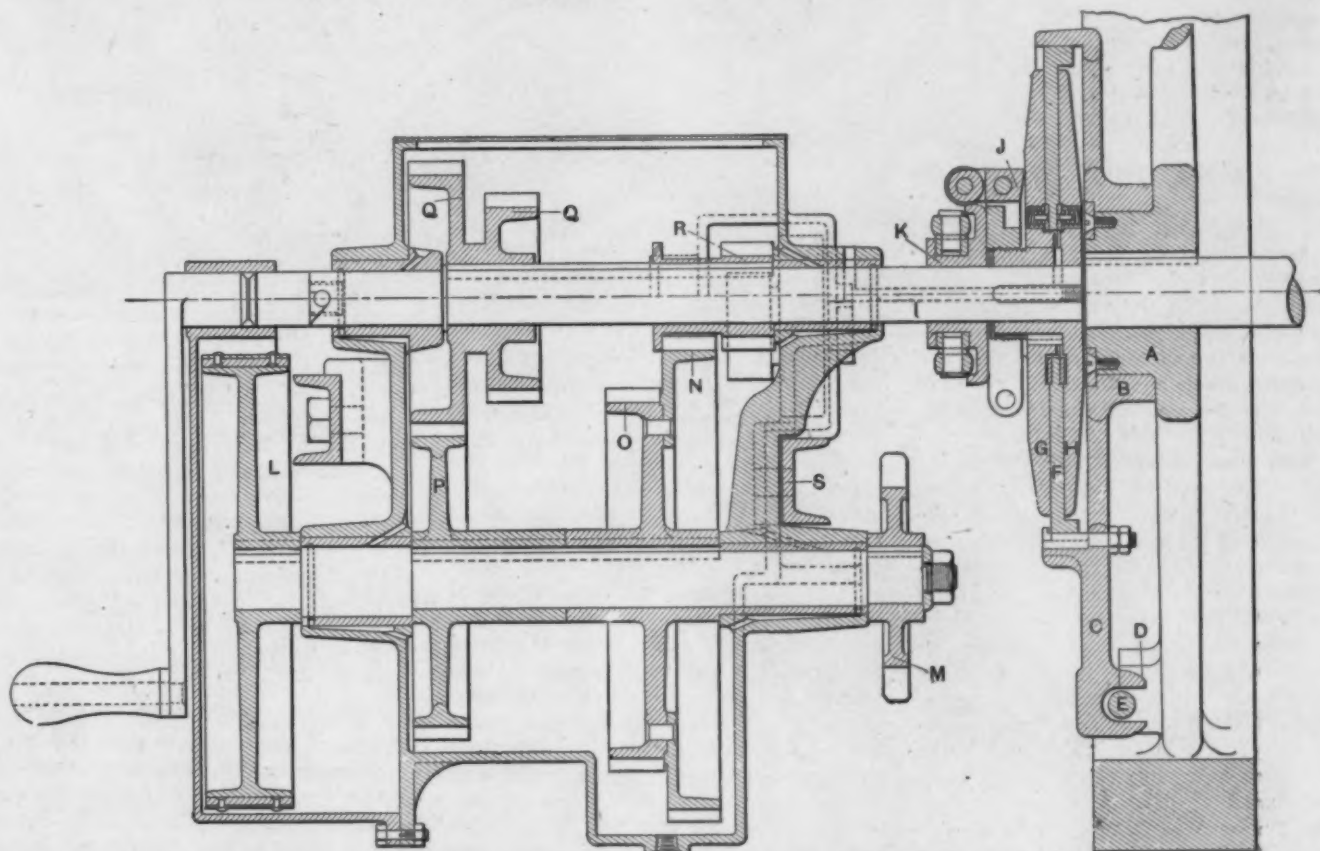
CLUTCH AND SPEED CHANGE GEAR MECHANISM OF PACKARD CAR.
